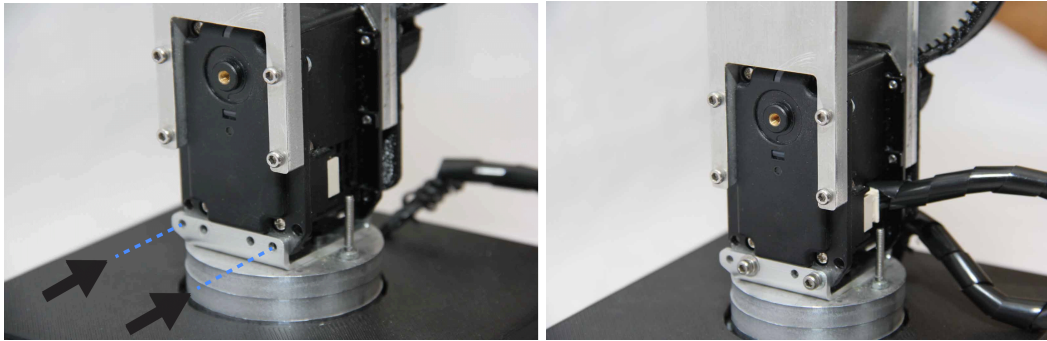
Install the prepared bolts in the holes indicated, aligning the holes in the lower arm motor.
